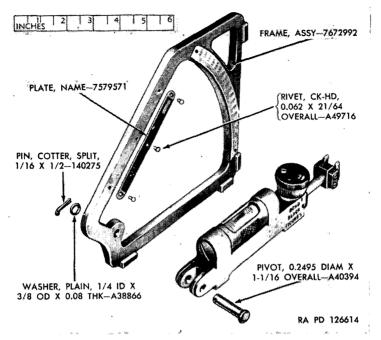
Level holder, radial arm, and name plate removed from frame assembly, gunner's quadrant M1.
